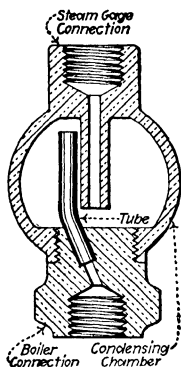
Sectional elevation of ball siphon and steam-gage connection.
